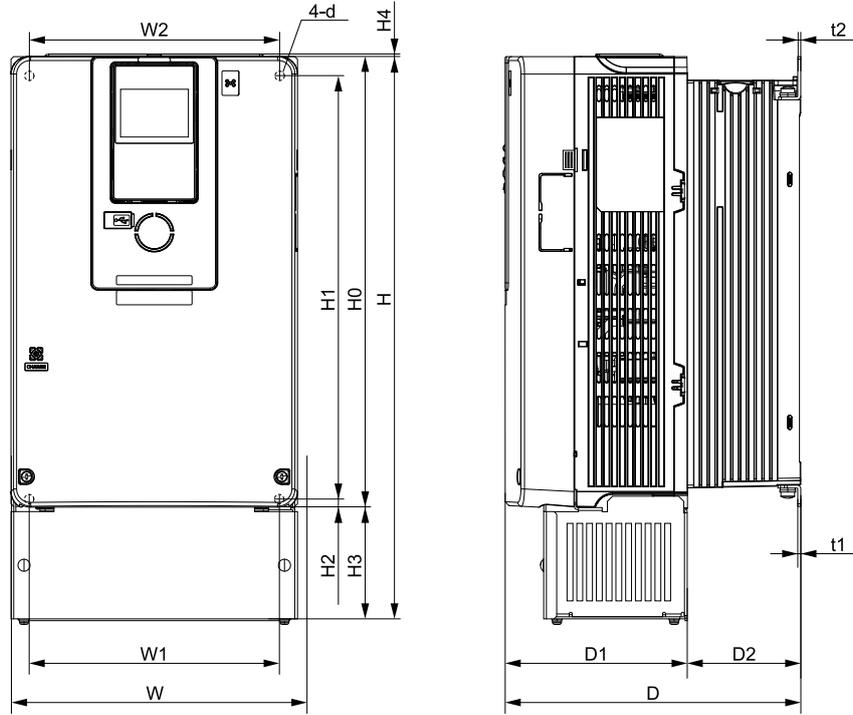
Exterior and Mounting Dimensions Diagram 3
